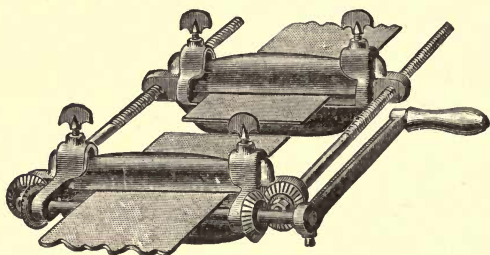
CLAMP FOR STRETCHING BELT AND HOLDING ENDS WHILE MAKING JOINT.
